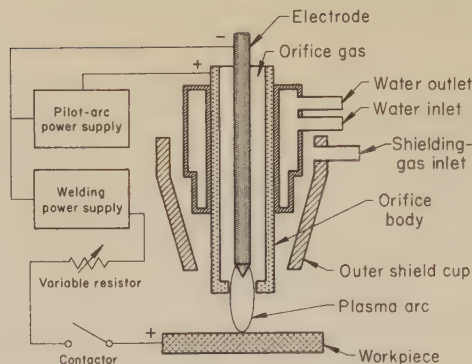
Schematic diagram of a low-current plasma-arc welding system, using a transferred arc
